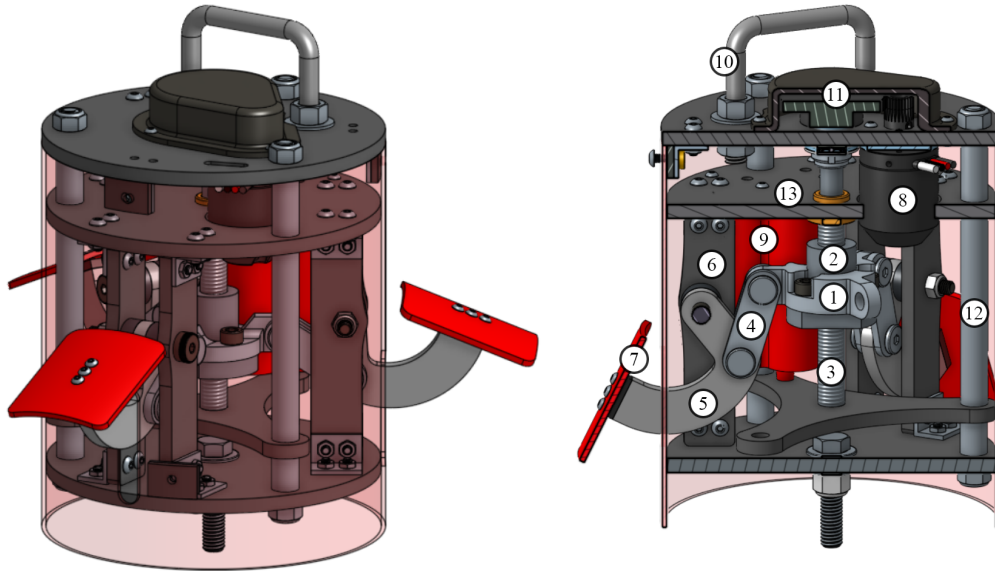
Overview of the airbrake mechanism. Shown are the nut cuff (1), ballscrew nut (2), ballscrew (3), linkage (4), arm (5), rib (6), flap (7), motor (8), battery holder (9), U-bolt (10), gear and case (11), threaded rod and spacer (12), G10 plates (13).
